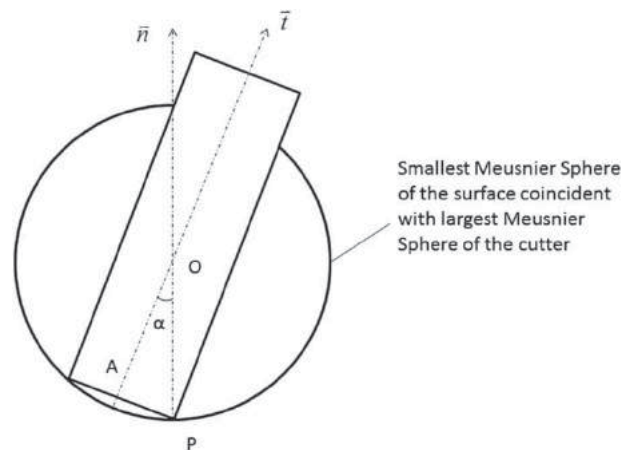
Machined surfaces and cutter Meusnier sphere.
